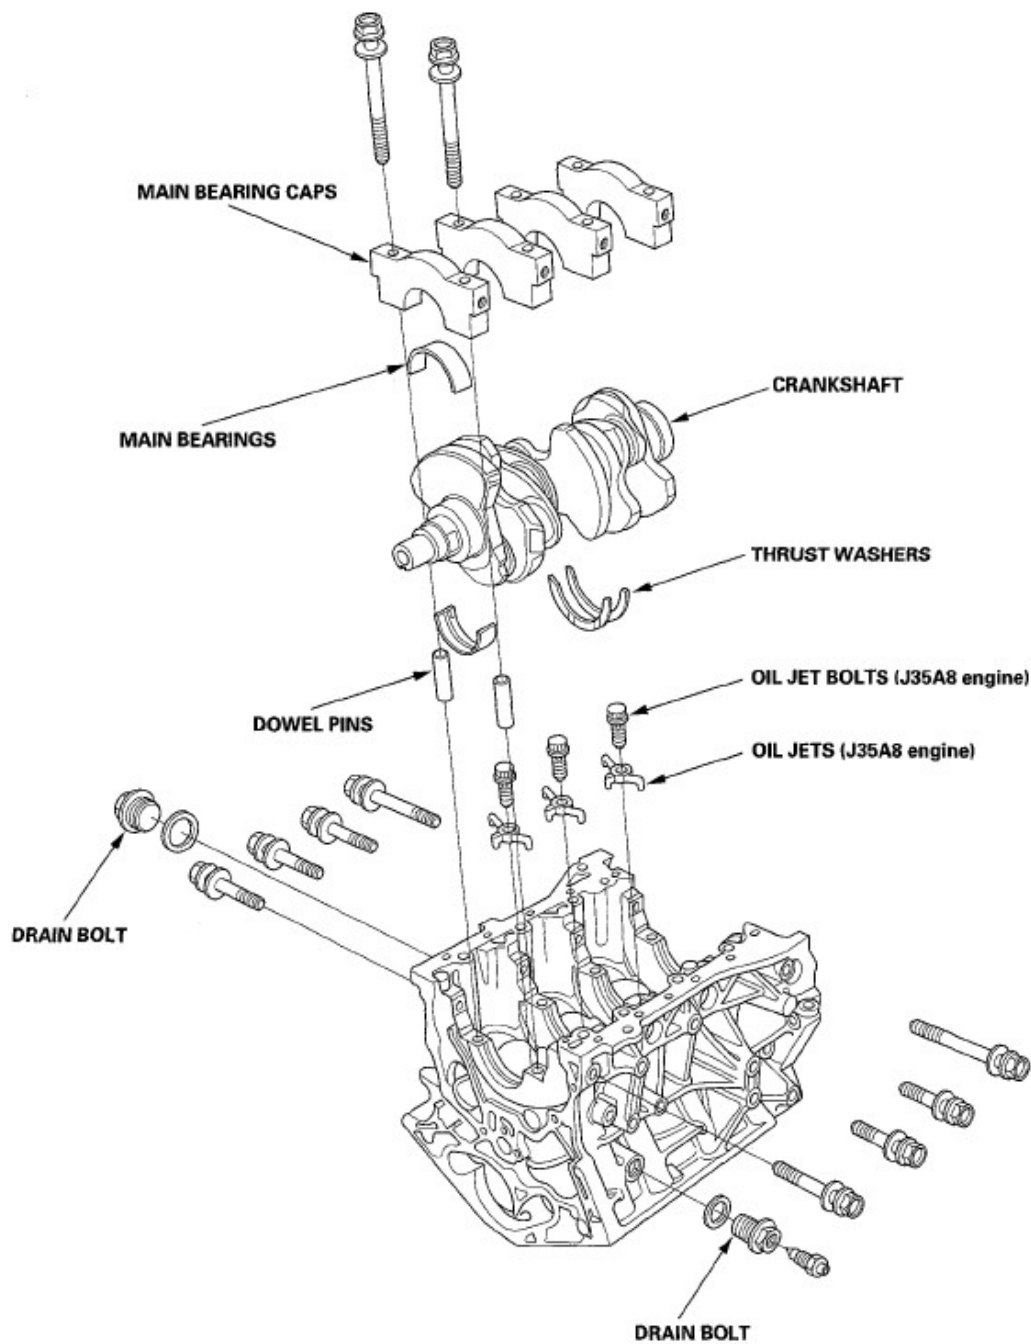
Identifying Engine Block Component Location (2 Of 3)
